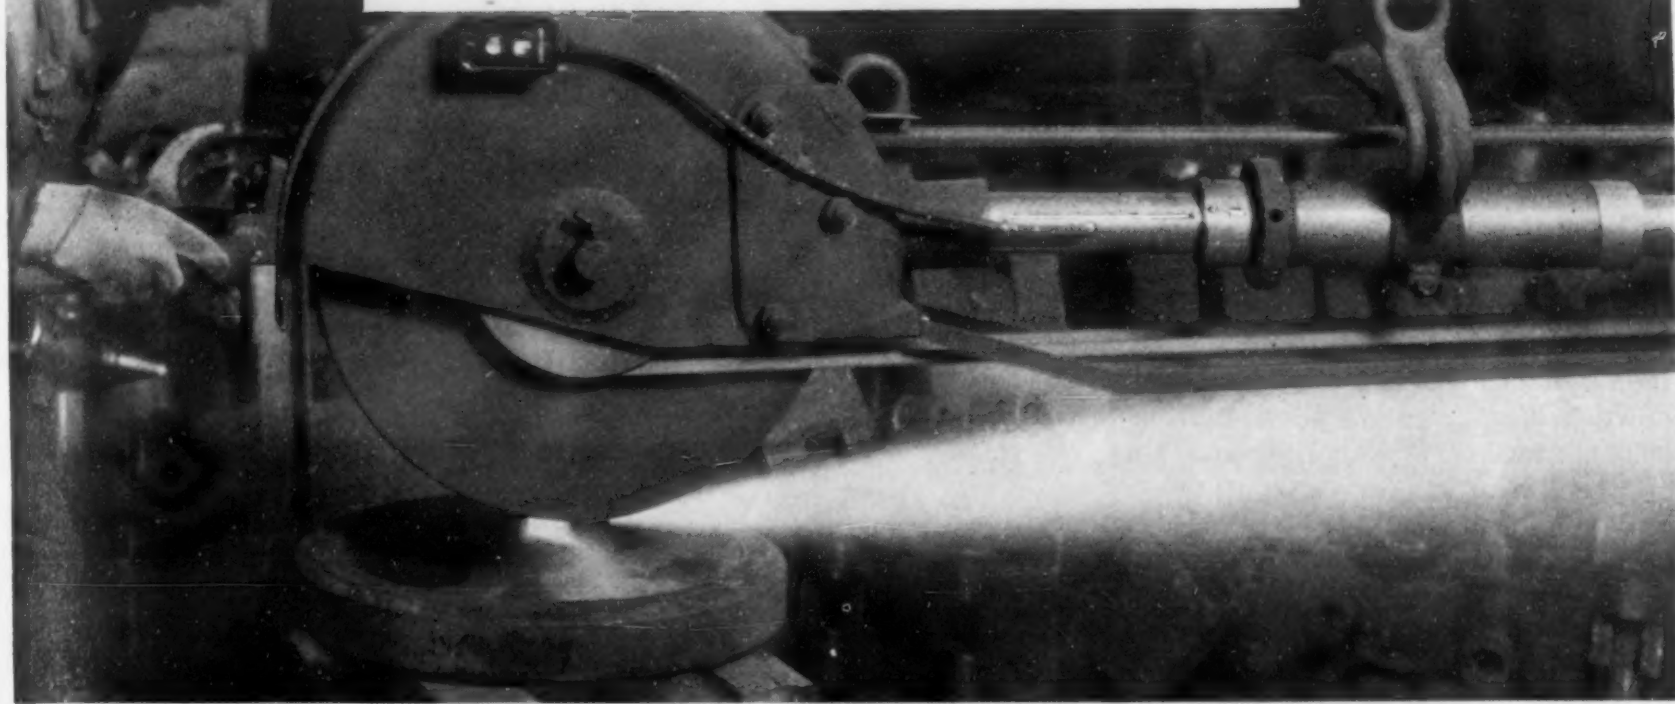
Modern Type of Swing-Frame Machine, Grinding a Steel Casting with Bakelite Wheel Running at High Speed
